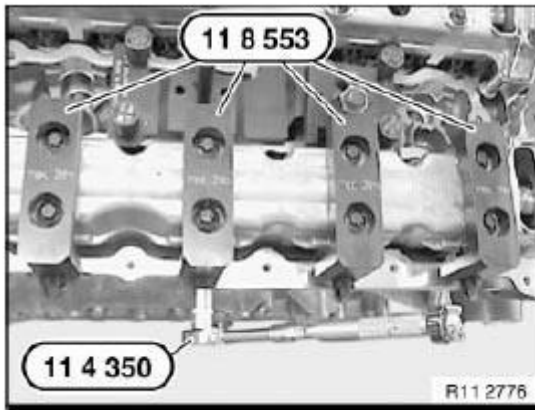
Identifying Special Tools (11 8 553) And (11 4 350)
